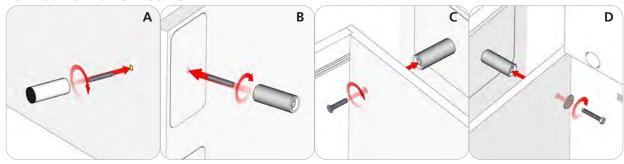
Image A. Use the hex key tool to drive the 2" set screw into the panel. Then, hand tighten the 30mm tube assembly 1 onto the set screw.
